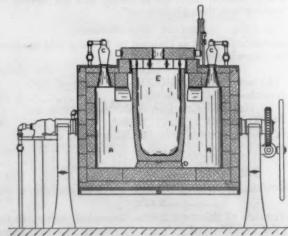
DOUBLE COMBUSTION CHAMBER FURNACE.
